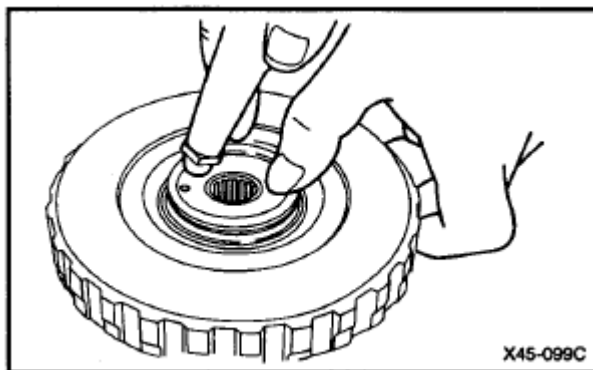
Blowing Air In Oil Passage On Rear Surface
